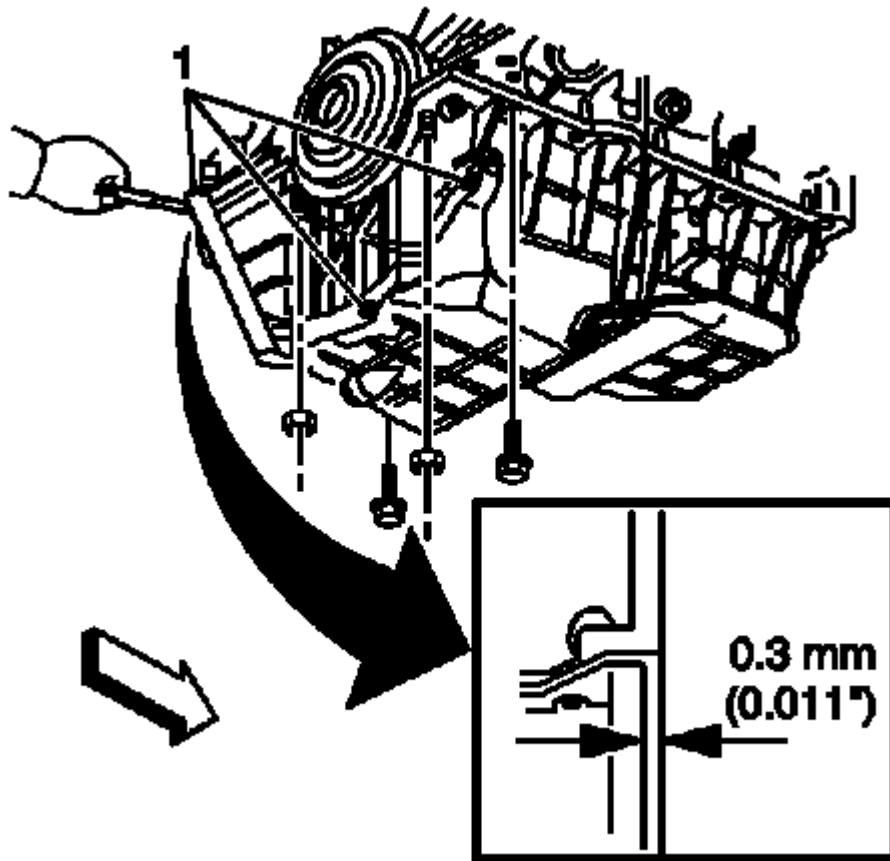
Measuring Oil Pan-To-Transmission Housing Clearance
